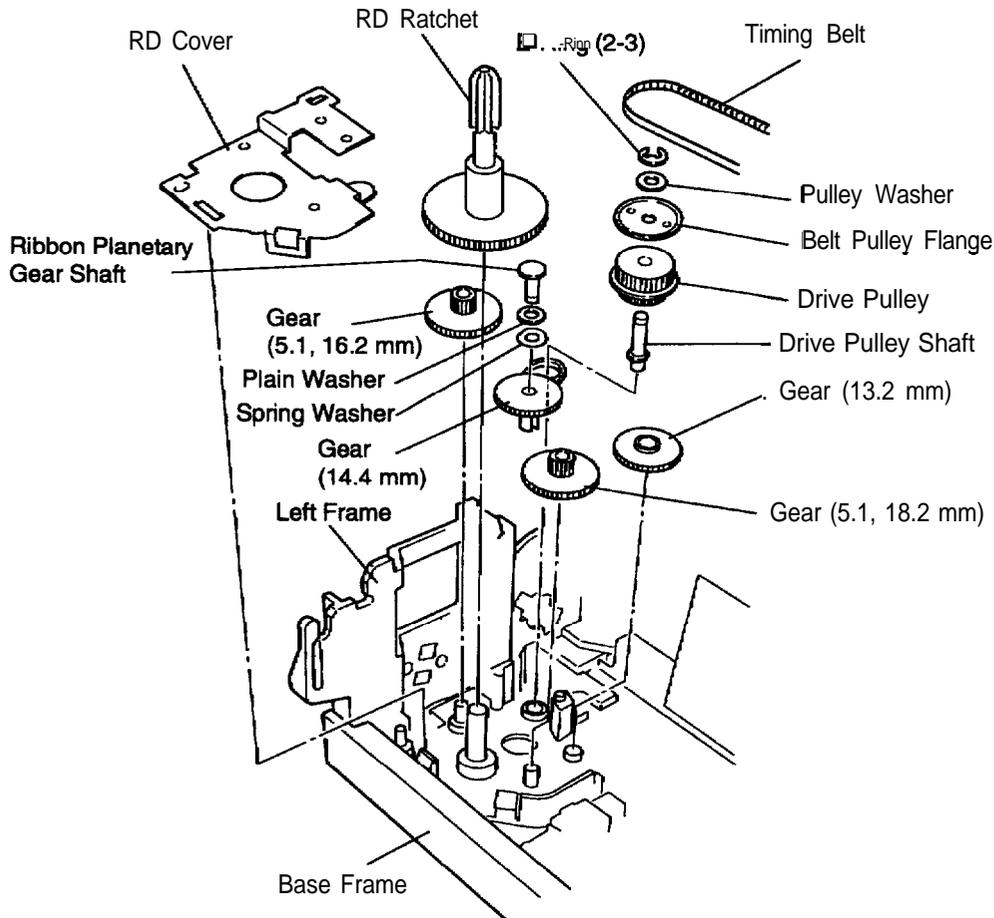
Removing the Ribbon Drive Gear Assembly
